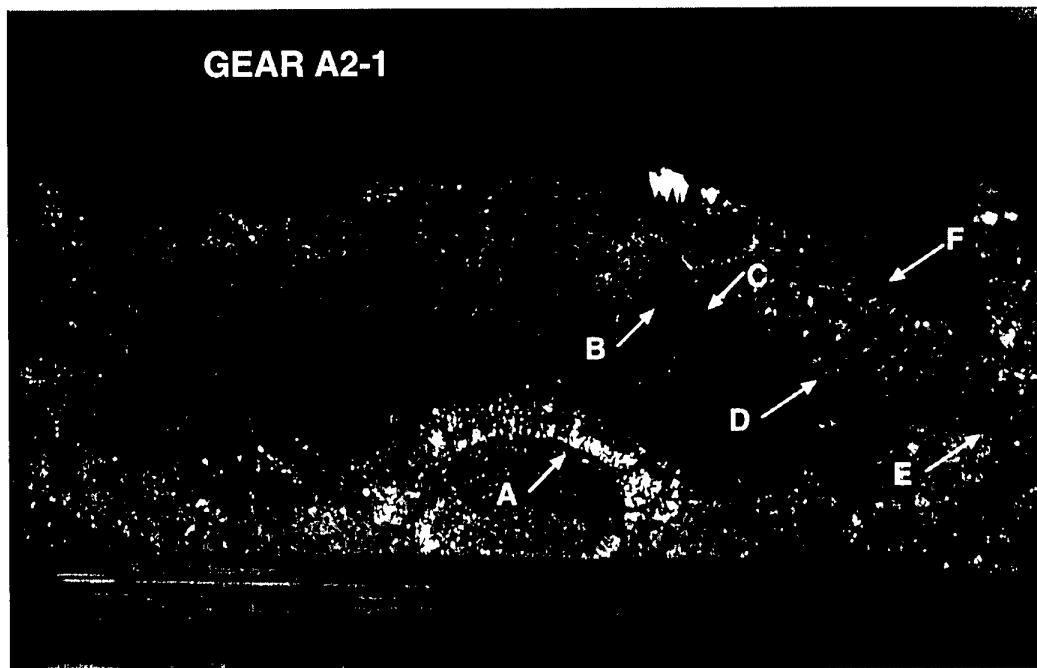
Indication of progression marks on fracture surface of Gear A2-1
